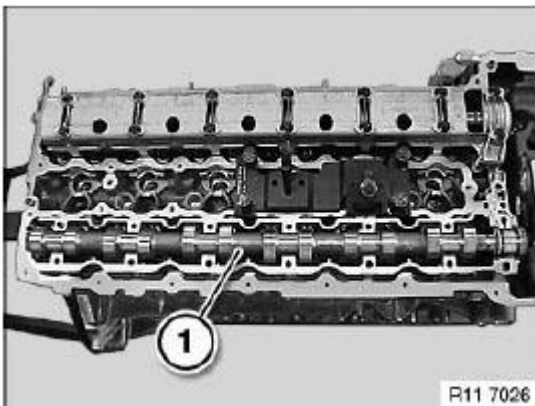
Identifying Exhaust Camshaft In Lower Bearing Bank
